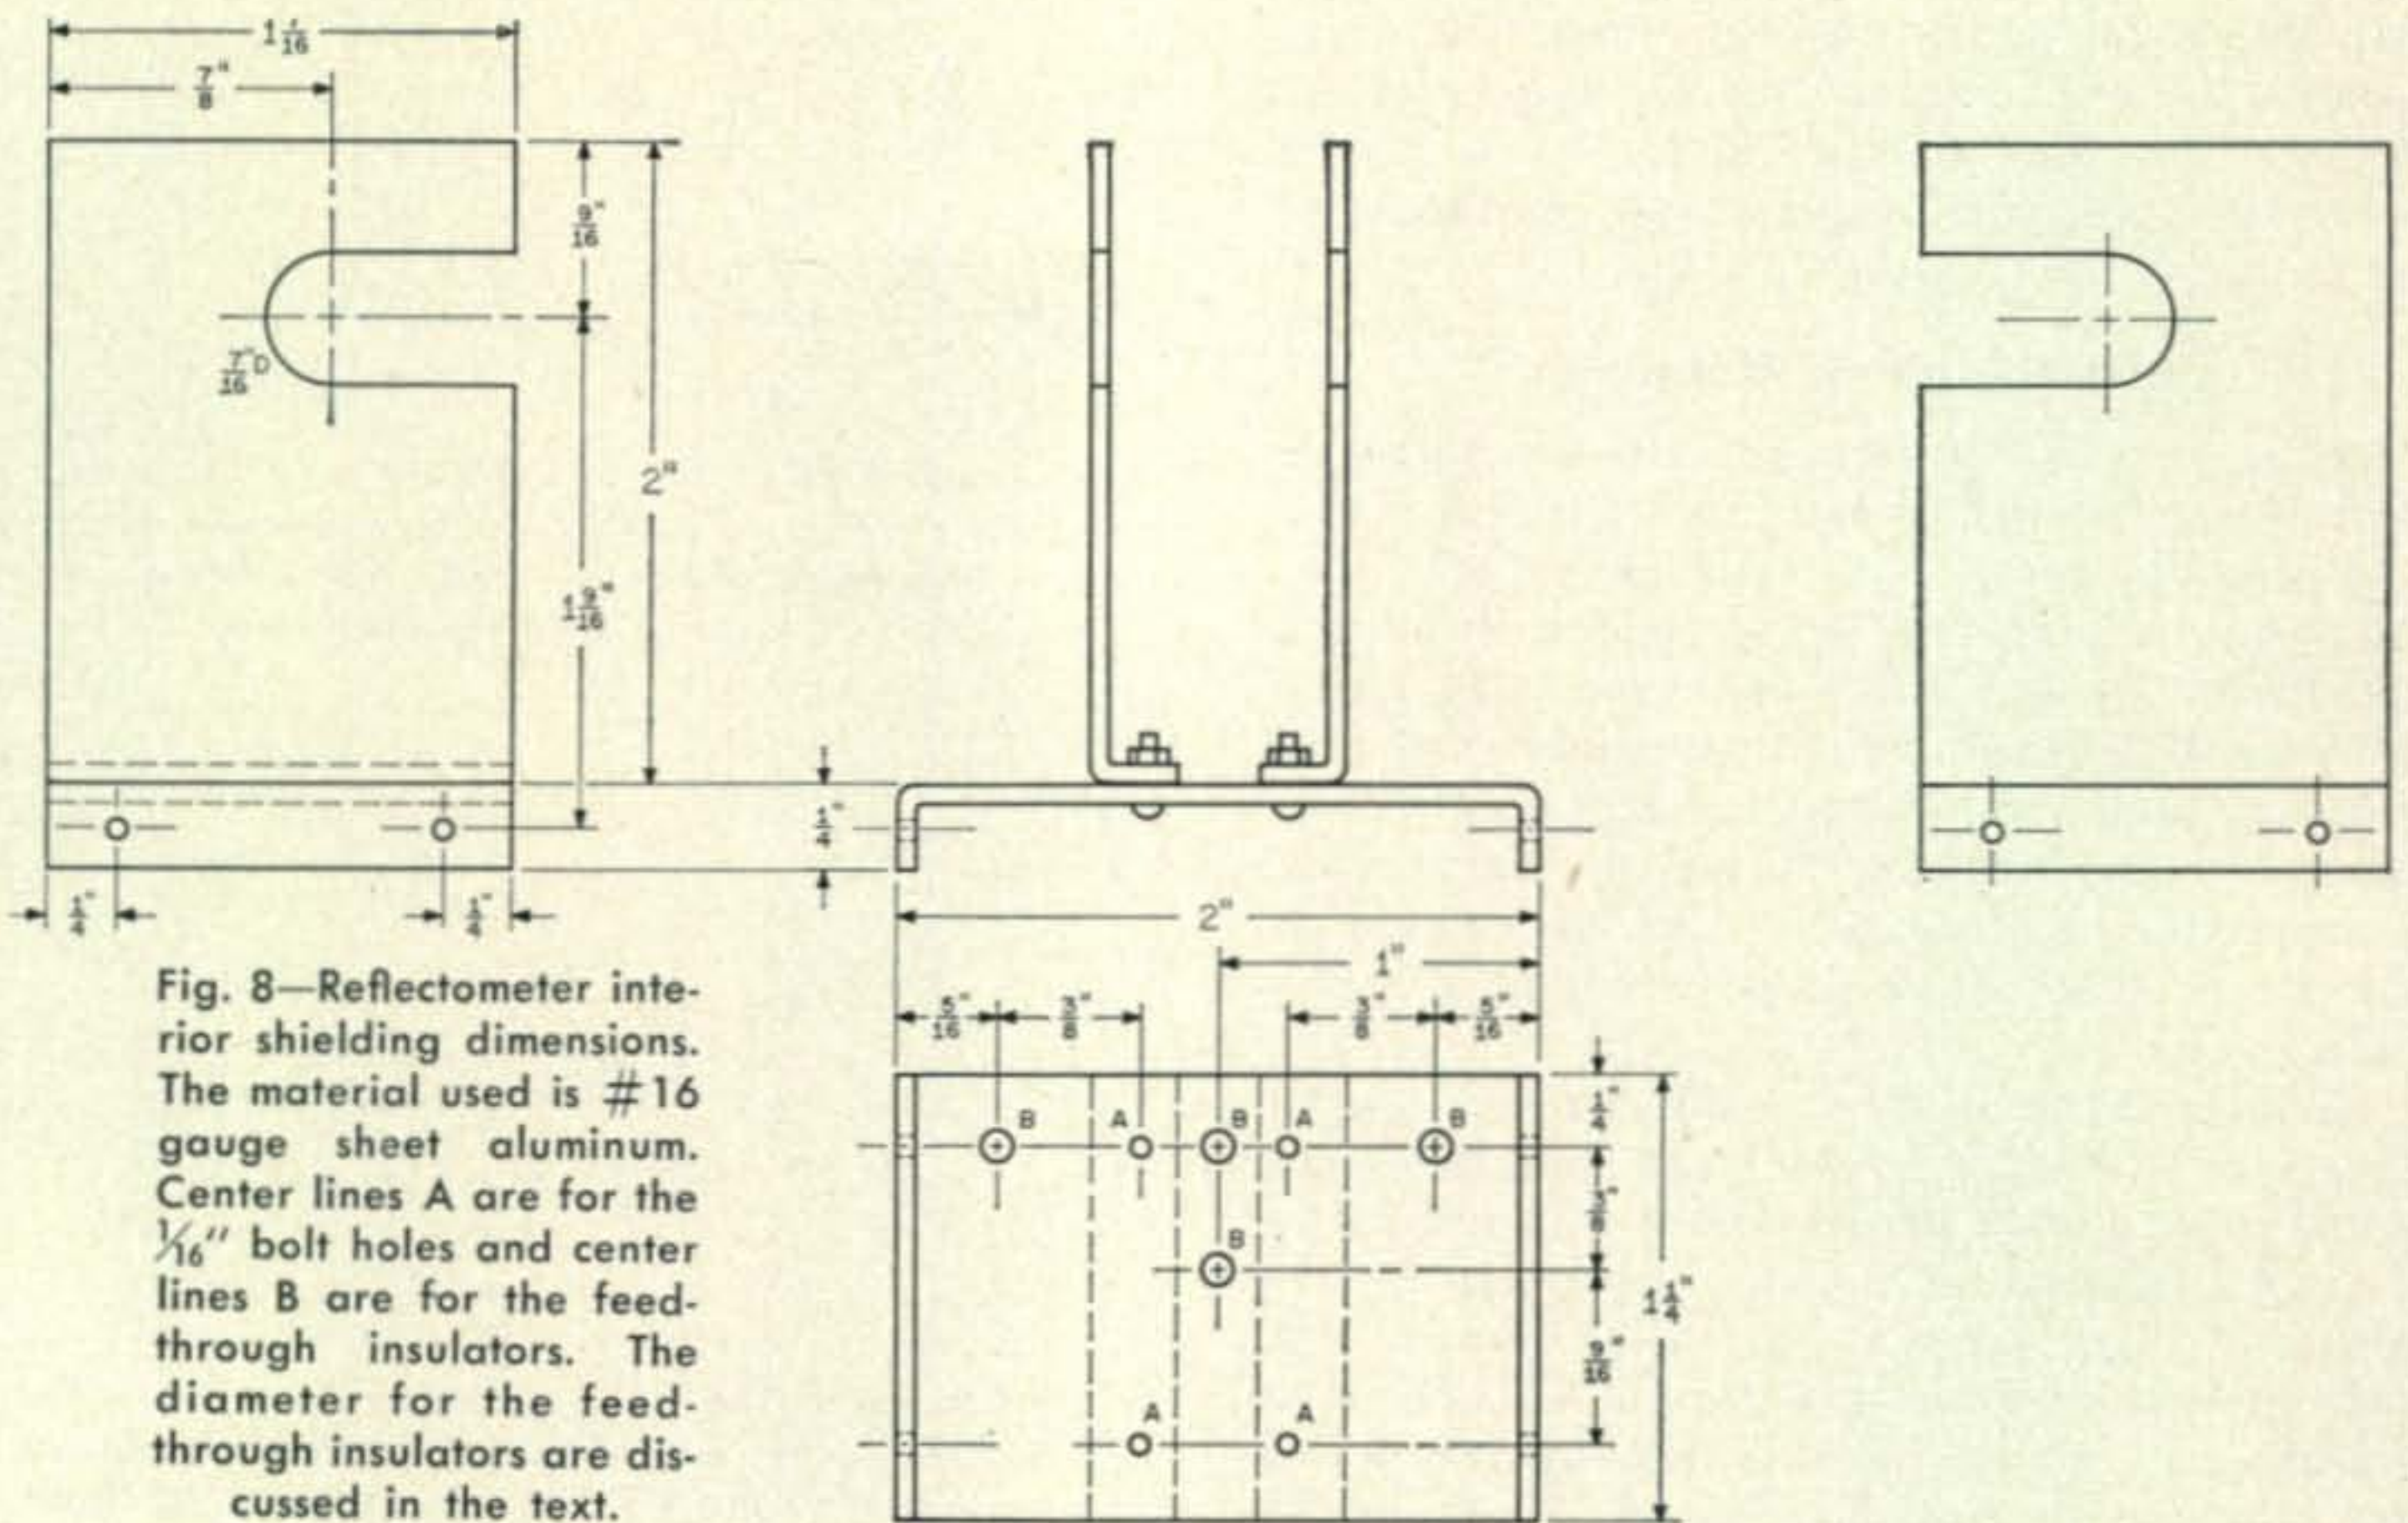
Reflectometer interior shielding dimensions. The material used is #16 gauge sheet aluminum. Center lines A are for the $\frac{1}{16}$ " bolt holes and center lines B are for the feed-through insulators. The diameter for the feed-through insulators are discussed in the text.
